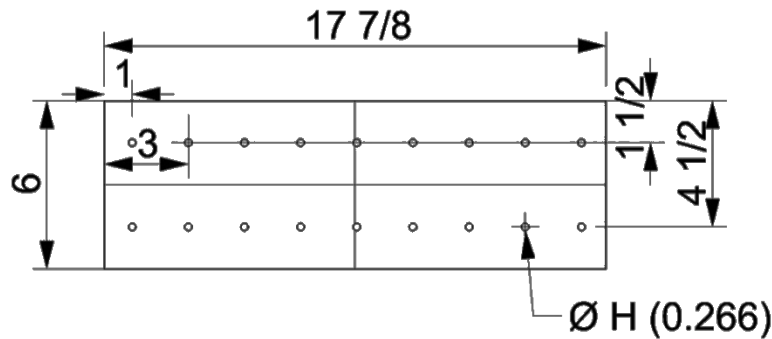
The dimensions (in inches) are shown for a plate doubler.
